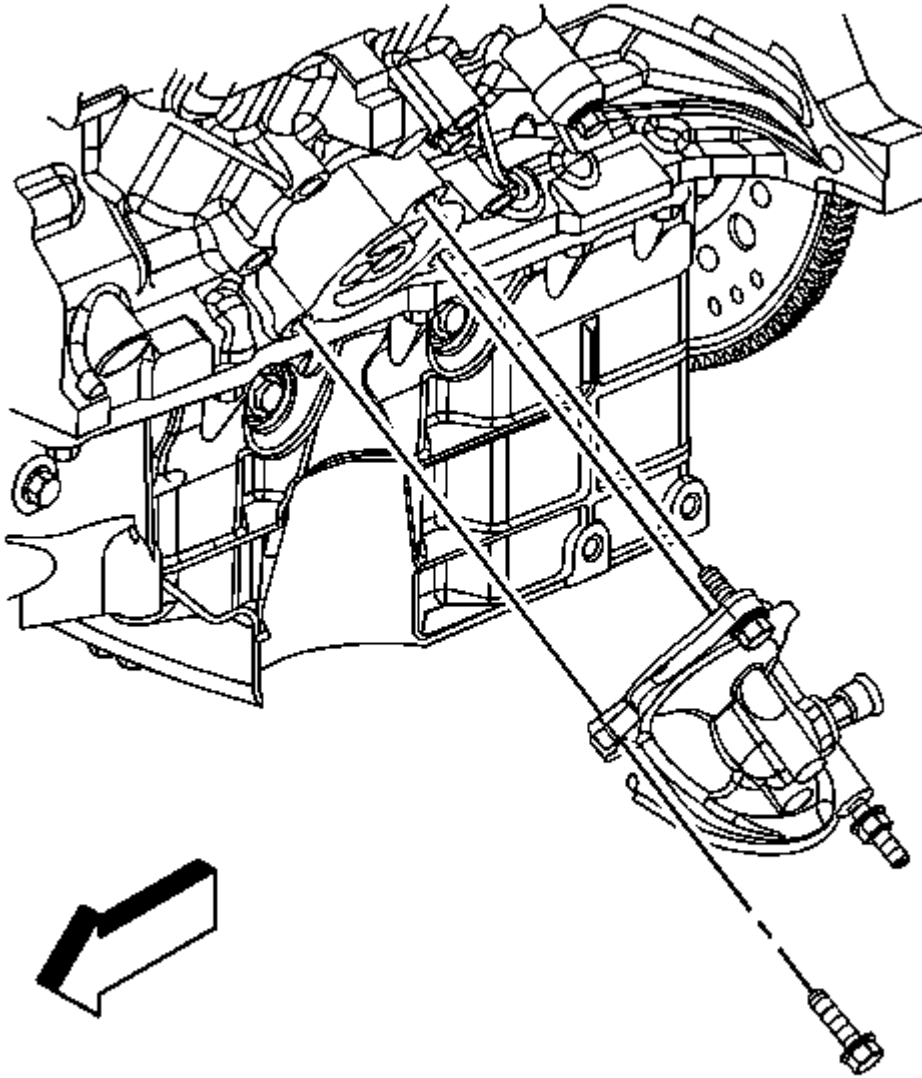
Identifying Oil Filter Adapter Bolts & Stud
